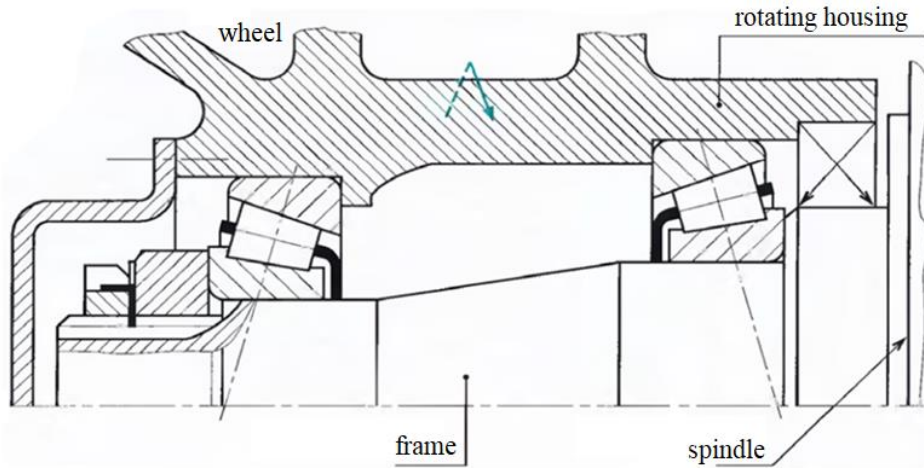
16: assembly of a rotating housing and fixed shaft (O).
